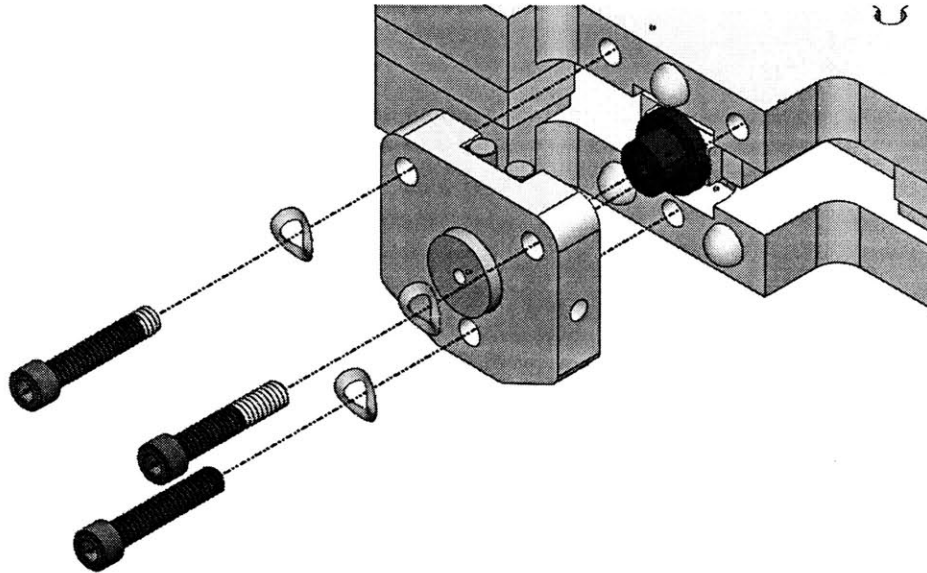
Exploded view of actuation module mounting on to load frame.
